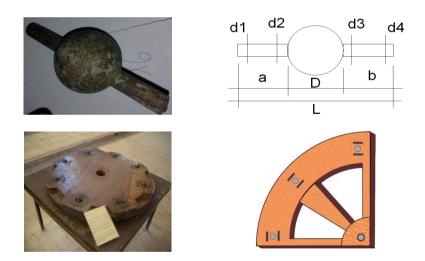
An example of mechanism design used in study of history of machines. Top, left: Roman bronze ball bearing of 1st century A.D. Top, right: a drawing model. Bottom, left: a reconstruction model of a circular platform with ball bearings. Bottom, right: a CAD design model of a circular module of a guide with ball bearings.
